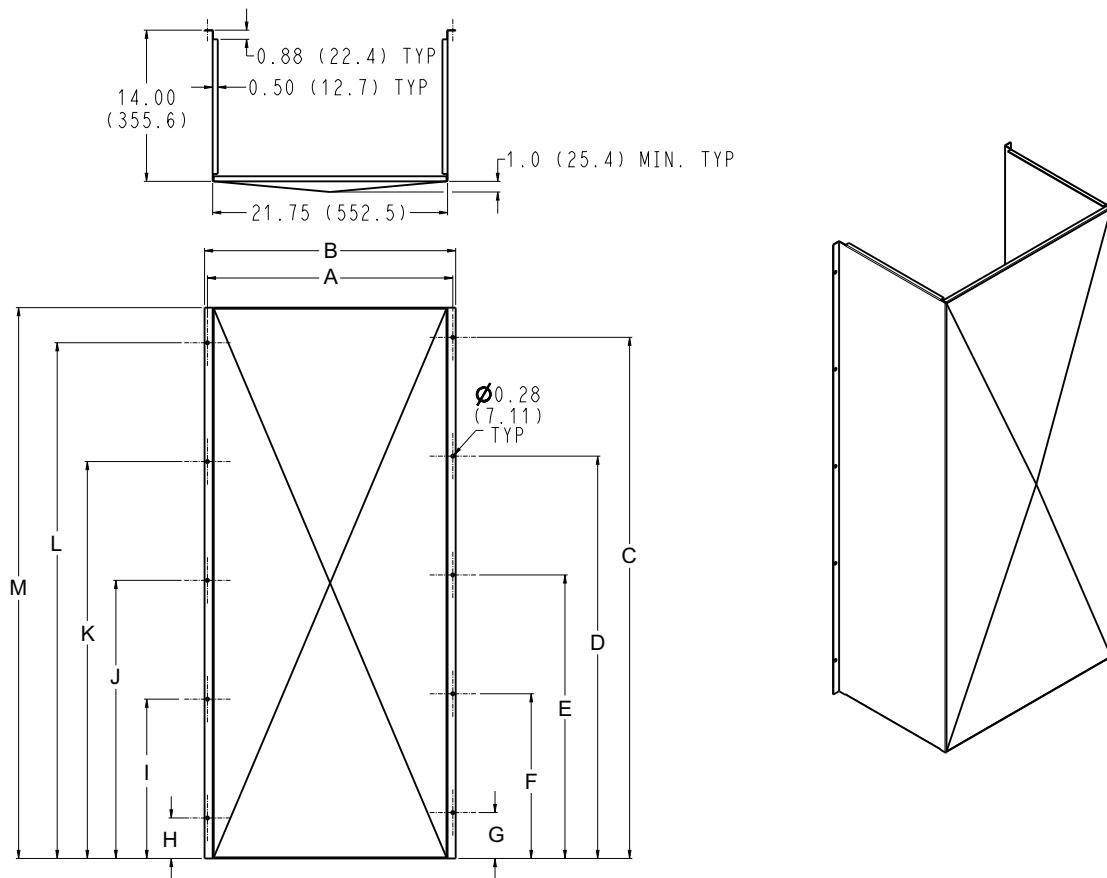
Cabinet C – Side Baffle E (Front/Top View)
